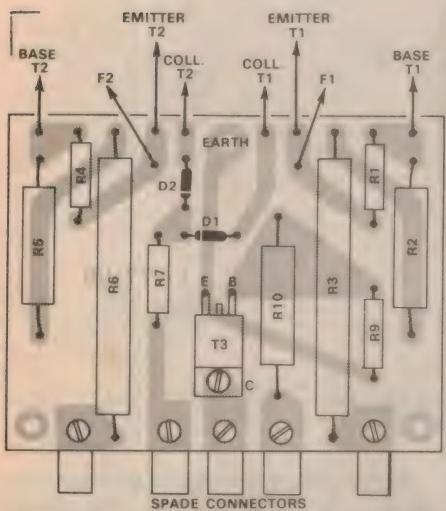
Full size reproduction of the printed board. Ready-made boards should be available through trade outlets.
